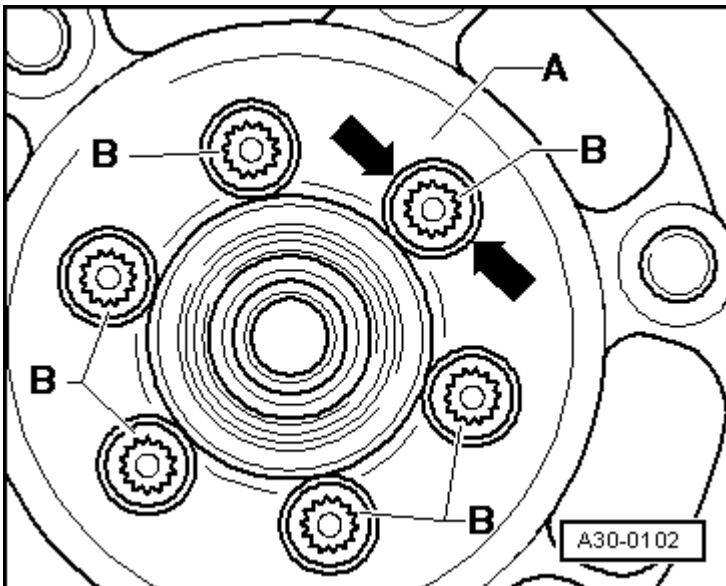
Identifying Dual-Mass Flywheel & Bolts
